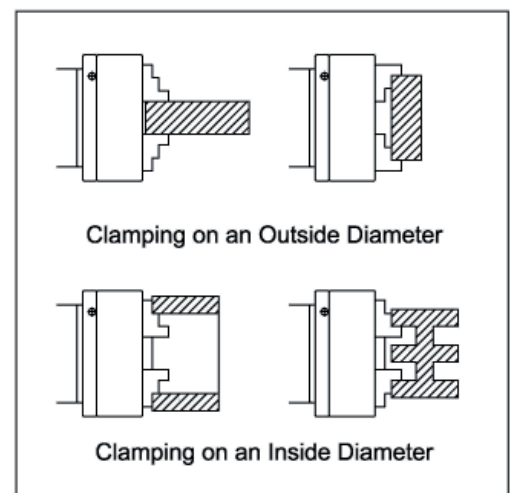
Examples of workpiece mounted in the 3-jaw chuck
